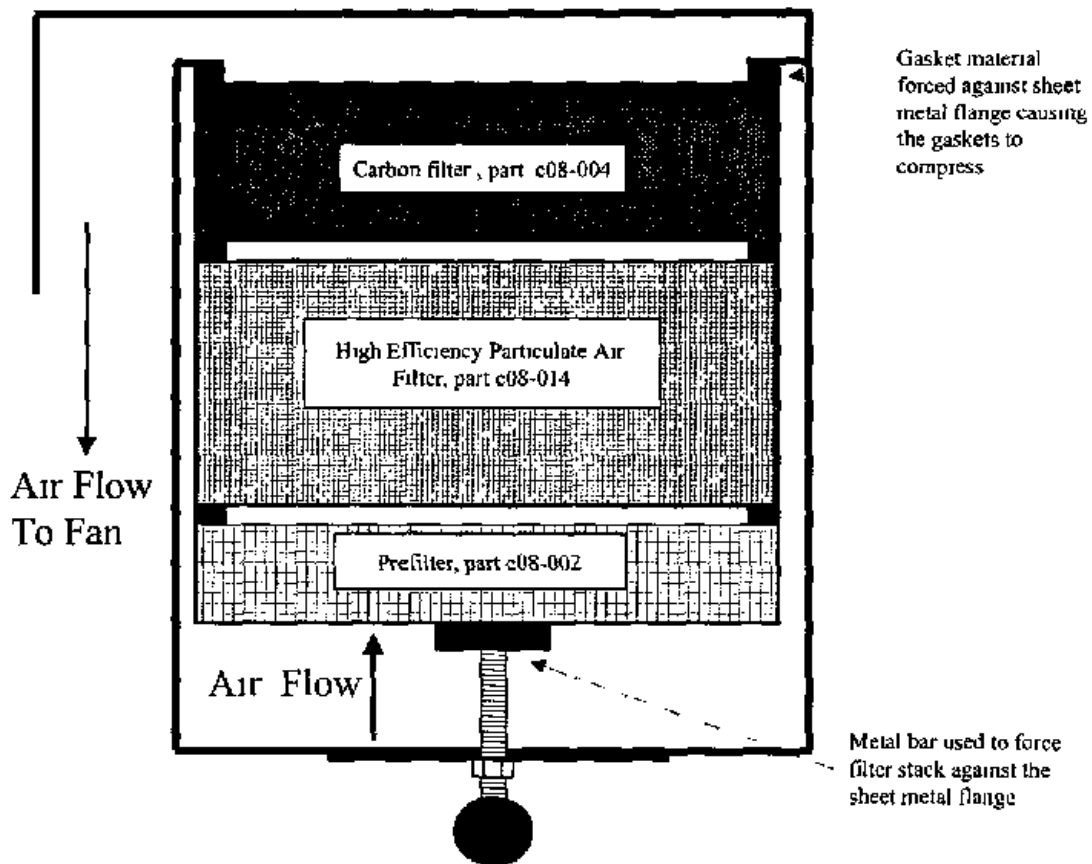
Schematic cross-sectional view of filters and mechanism for seating the filter
